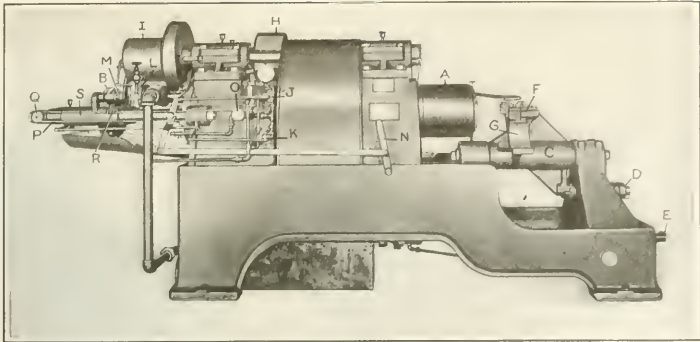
Front View of Warren Lathe for rough-turning Nose of 5-inch Shell Forgings
